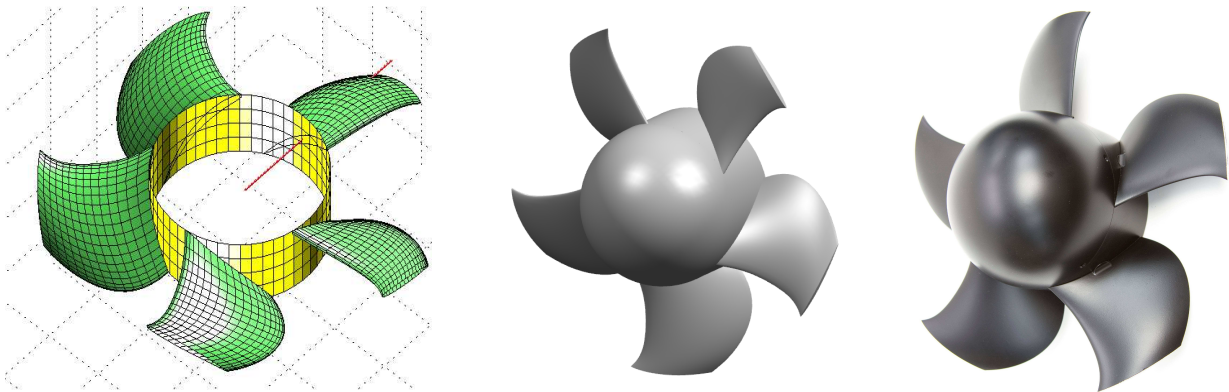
Rotor USI7; left: Design with blade element momentum theory - 15 blade elements along span; middle: 3D-CAD model; right: Manufactured from aluminium by 3D CNC-milling (blades mounted on cylindrical hub)
